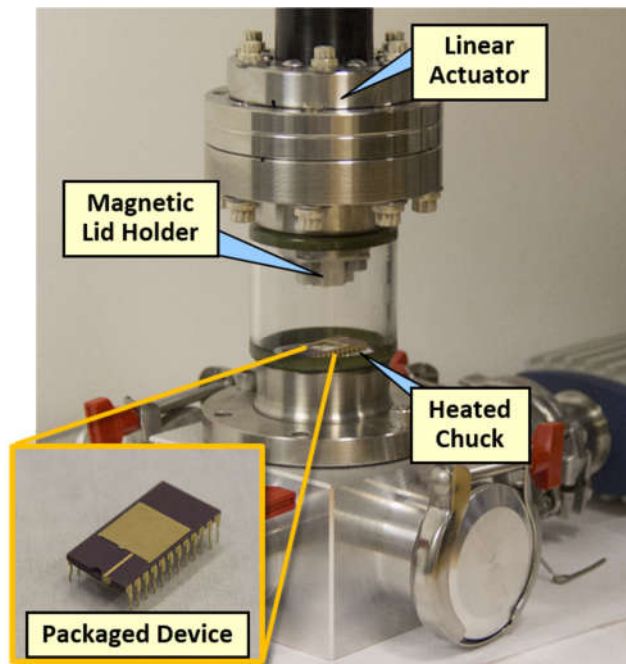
Hemermetic vacuum packaging tool with zoom-in (inset) on a DIP package sealed via the tool.
